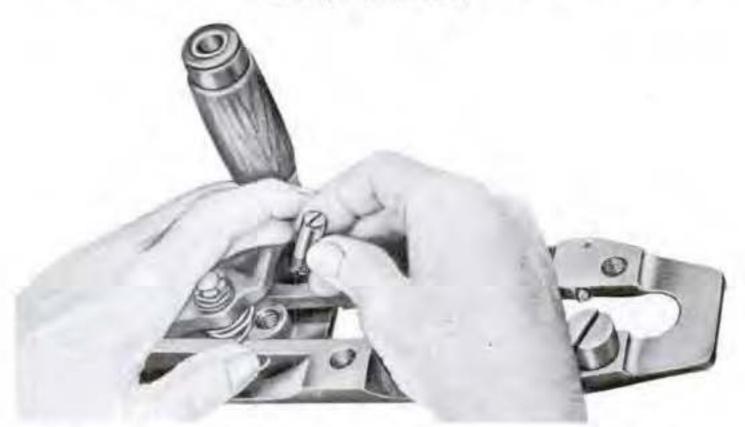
Lever rotated to clear stop hole in slide, and lever and spring
